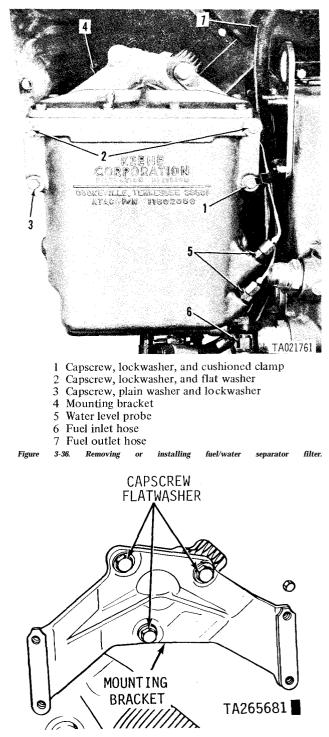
Remeving or installing fuel/water separator filter mounting bracket.
